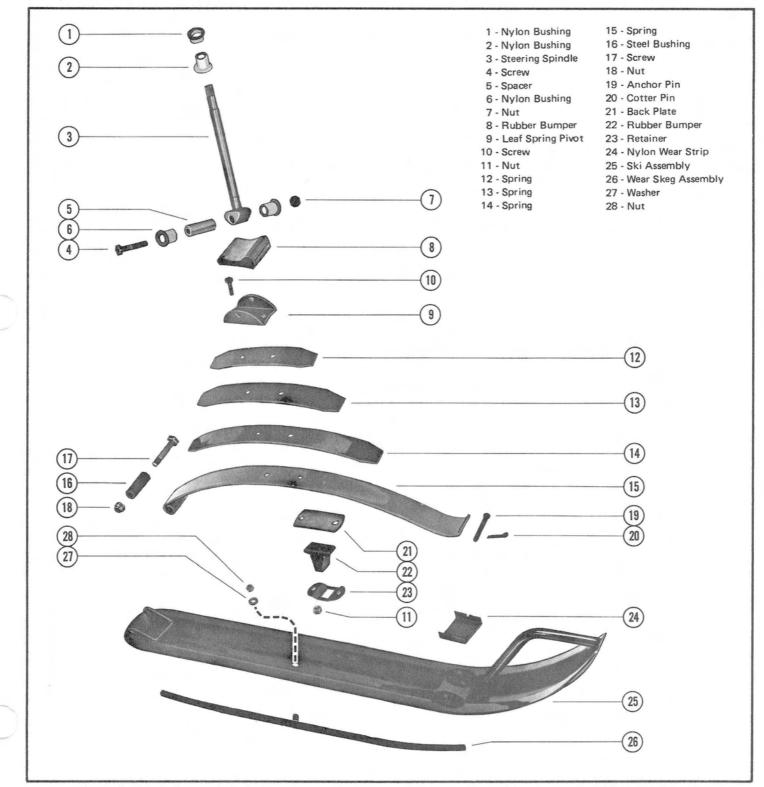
Ski, Spring and Spindle Components for 200-220-250, Rocket and Lightning Models(250 Model Shown)
